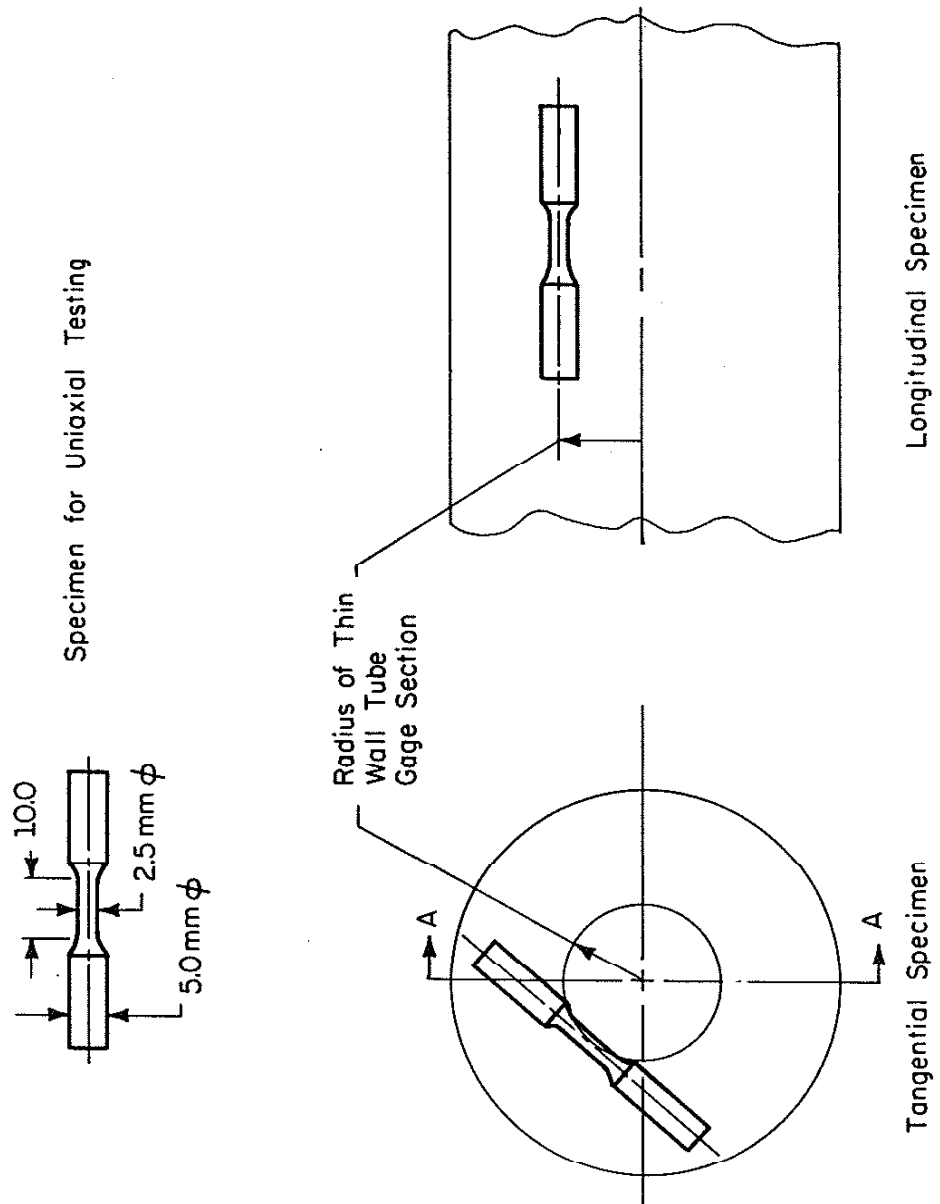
Position and Geometry of 2.5 mm Diameter Specimens Taken from Bar Stock
